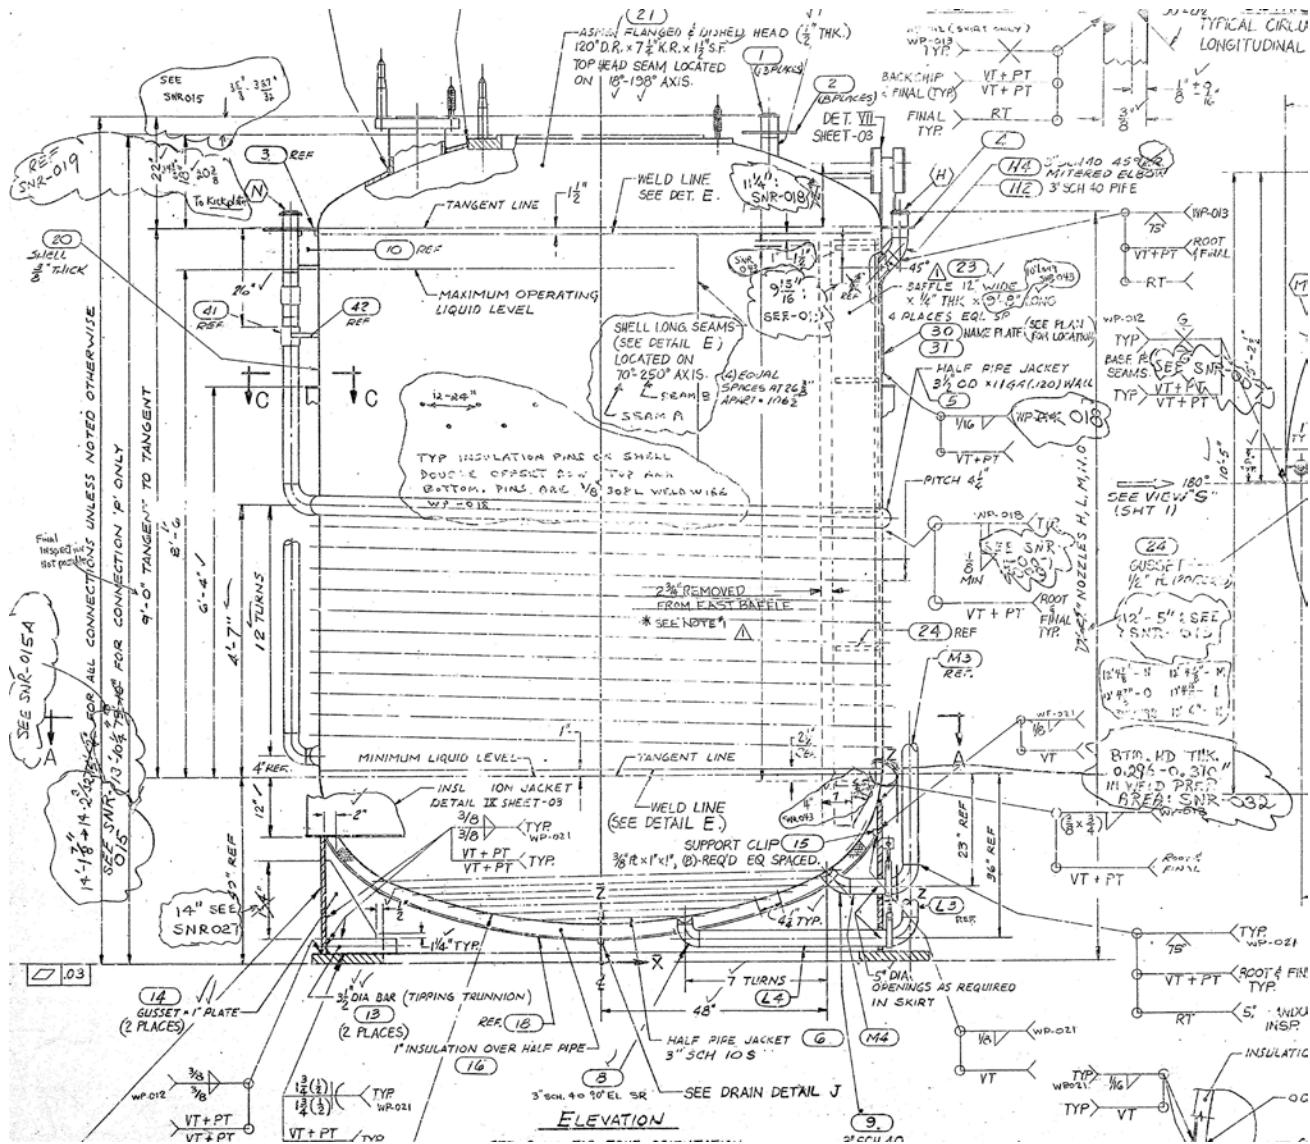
CFMT Elevation View (From Drawing 58-5221-5-662, Rev. 2, Sheet 2 of 3)
